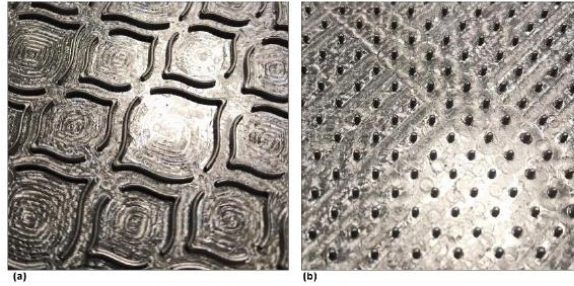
Photographs of steel embossing plates: (a) deco embossing and (b) micro embossing.
